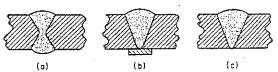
Weld types: (a) Double-welded butt joint, back-chipped before welding second side. (b) Single-welded butt joint, with backing strip which may or may not be removed. (c) Single-welded butt joint, no backing strip (permitted only for certain circumferential welds).
